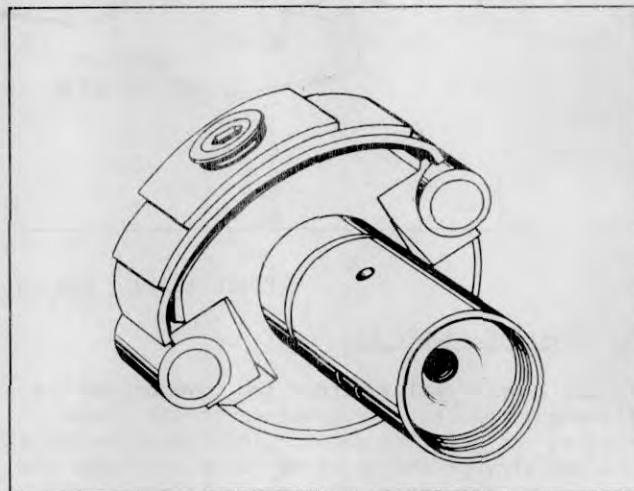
Typical Assembly Of Distributor Rotor And Leaf Springs
